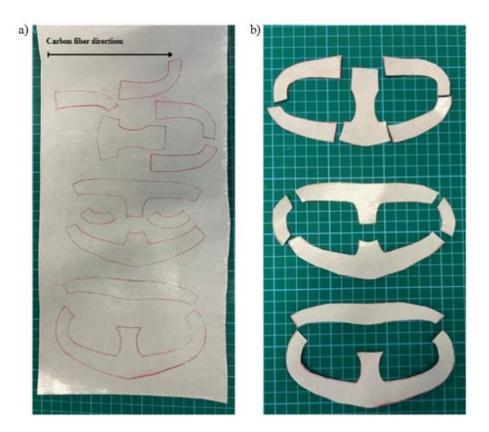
(a) Drawing of the ply patterns to be cut from the prepreg sheet; (b) corresponding cut pieces ready for lay-up.
